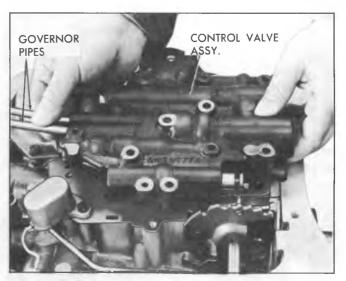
T--Removing Control Valve Assembly and Governor Pipes from Case
